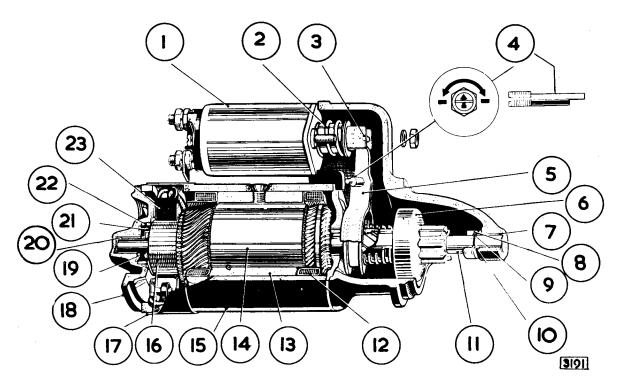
The Pre-engaged Starter Motor Model M45G.
